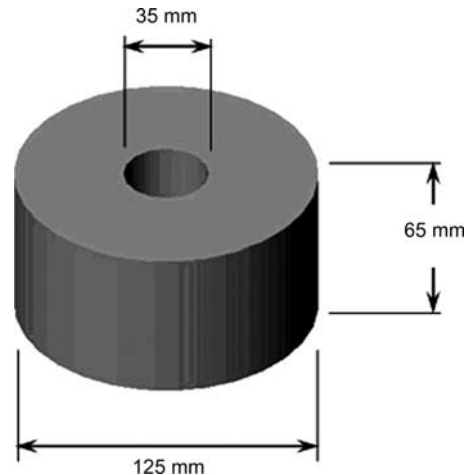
Isometric perspective of the compressive test specimen including geometrical dimensions.
